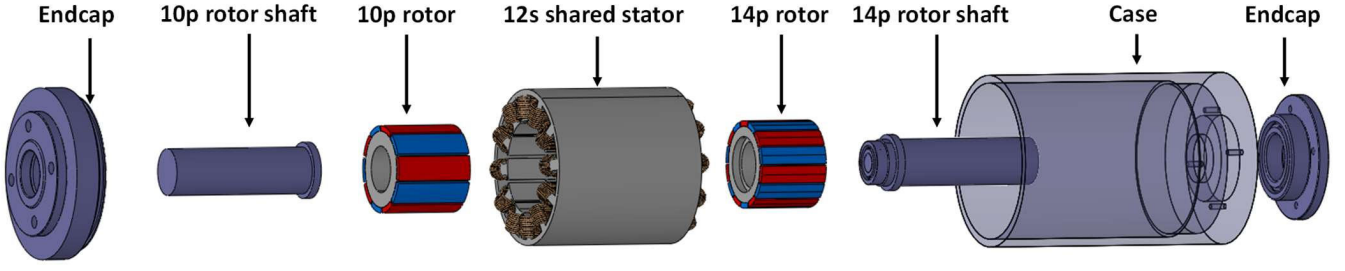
Proposed CSDPM machine mechanical structure.
